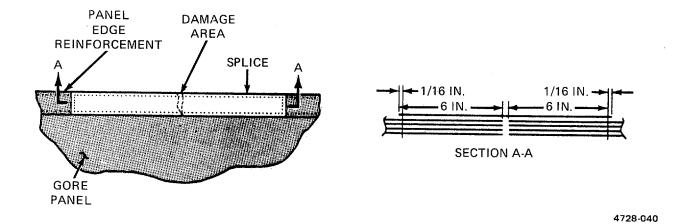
Panel Edge Reinforcement Splicing Details.
